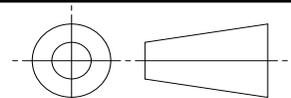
FITTING, BUSHING-SCREW THREAD EXPANDER
